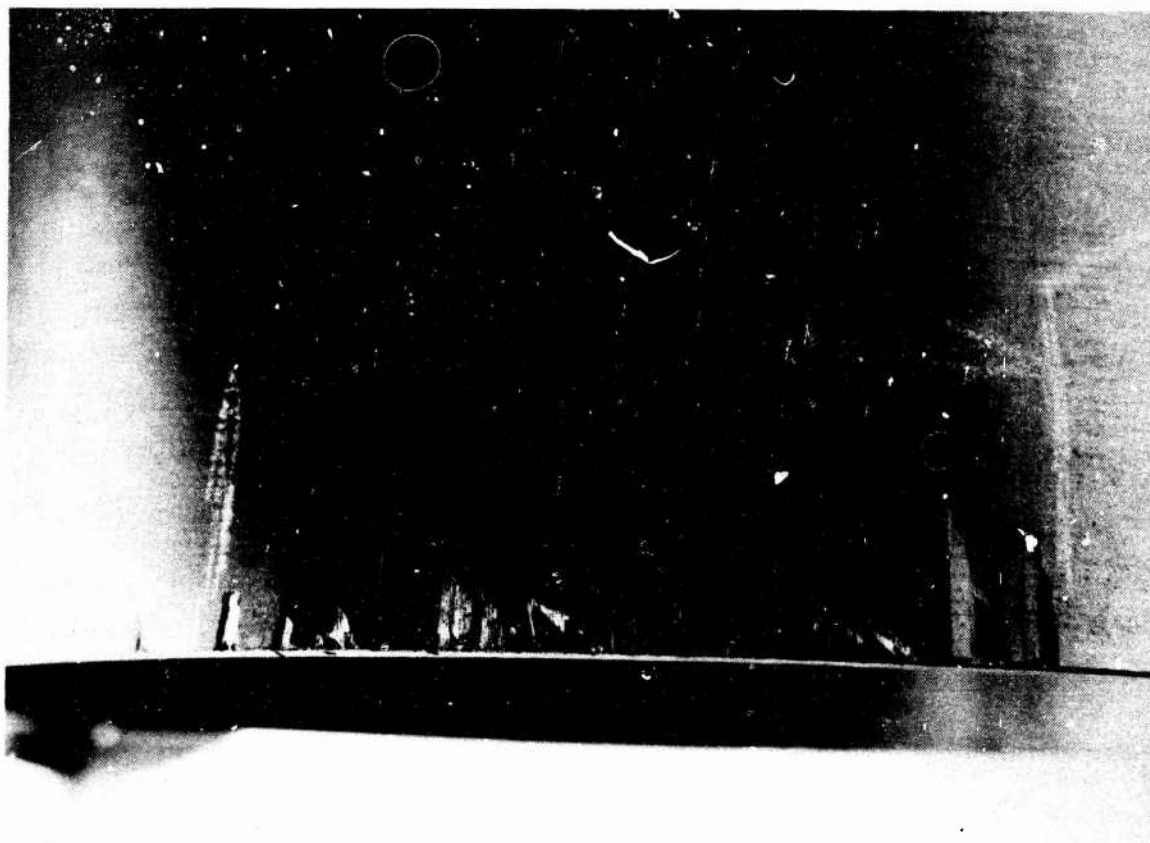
Machining Damage of Large Diameter of Cone 48126-11
